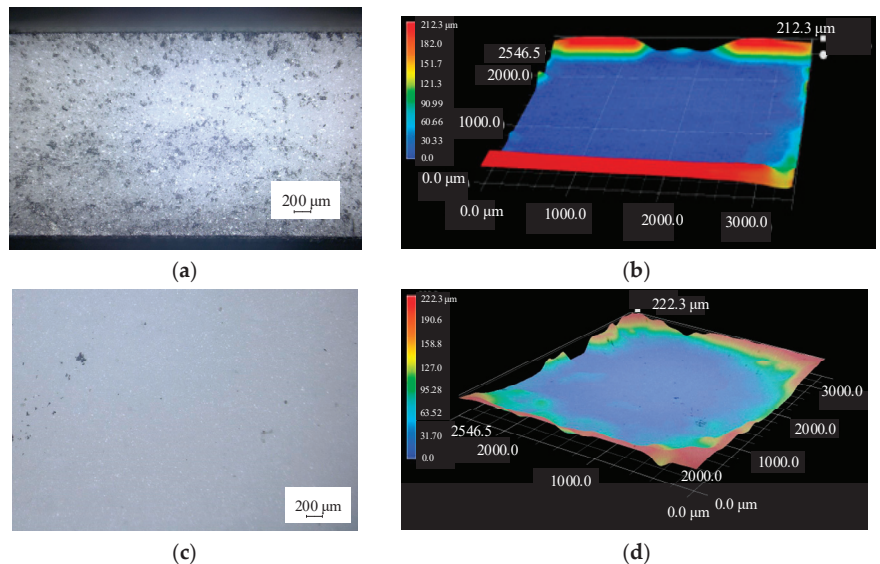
Experimental results of cutting  $\text{Al}_2\text{O}_3$  ceramic with thickness of 8 mm with MIDT. (a) The workpiece before cutting, (b) fracture surface after cutting, (c) top surface and the crack propagation path after cutting.
